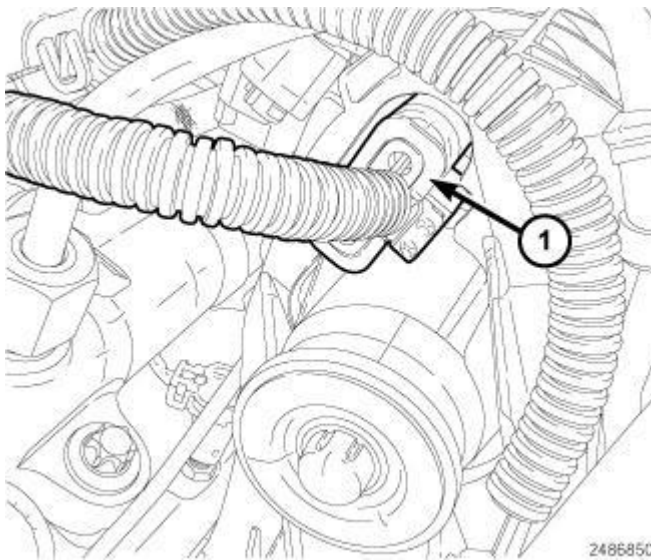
Knock Sensor Electrical Connector, Mixing Chamber & Bolts
